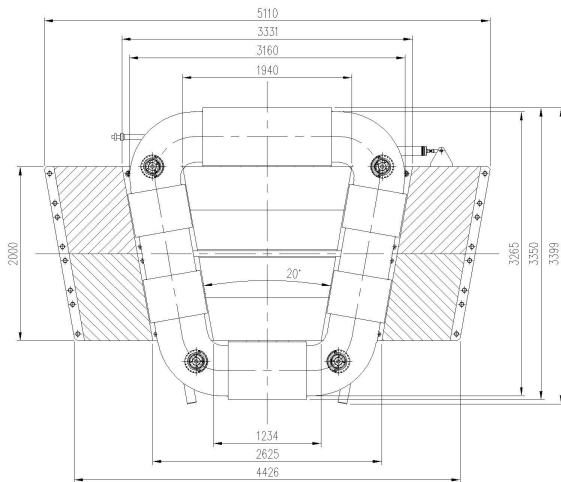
Top view of the dipole magnet with superconducting winding.
